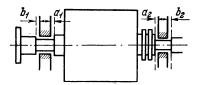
Setting the axial play of the shaft a_1 , a_2 , b_1 and b_2 — clearances between the necks of the shaft journals and the butt ends of the bearing shells
